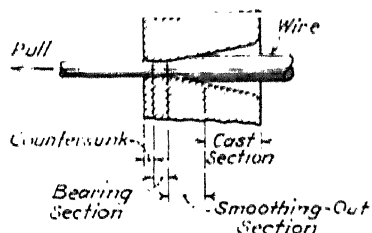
Wire drawing, cross-section of die hole. (American Steel and Wire Co.)
